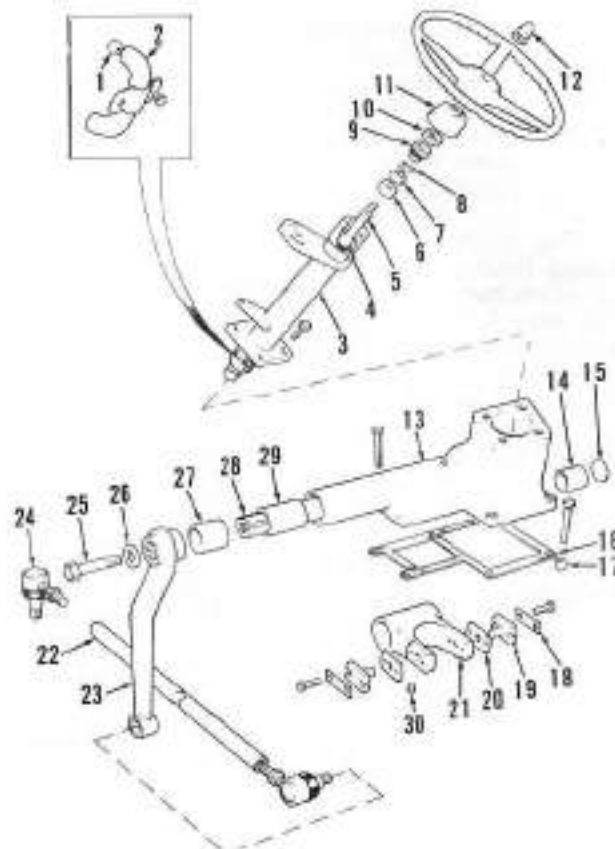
Exploded view of Model 1210 steering gear housing, cross shaft and steering arm. Shims (24) are used to center rocker arm only and do not control cross shaft end play.
